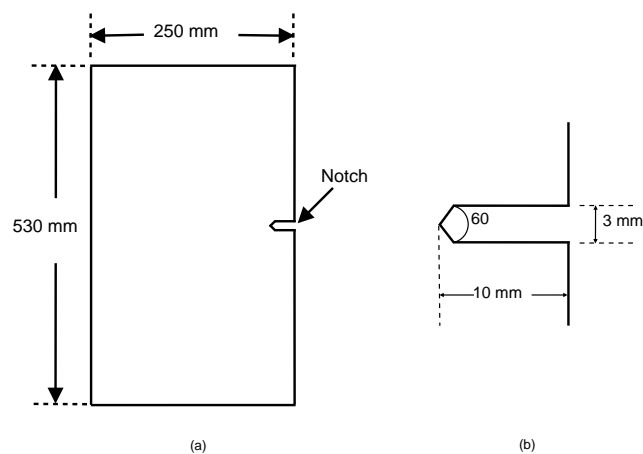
(a) Single edge notch test sample (b) Notch dimensions
